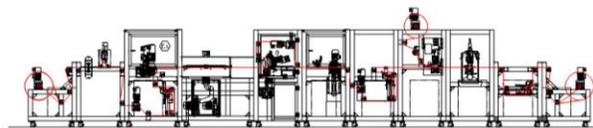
Drawing of a Coatema Coating machinery with nano-imprinting unit
